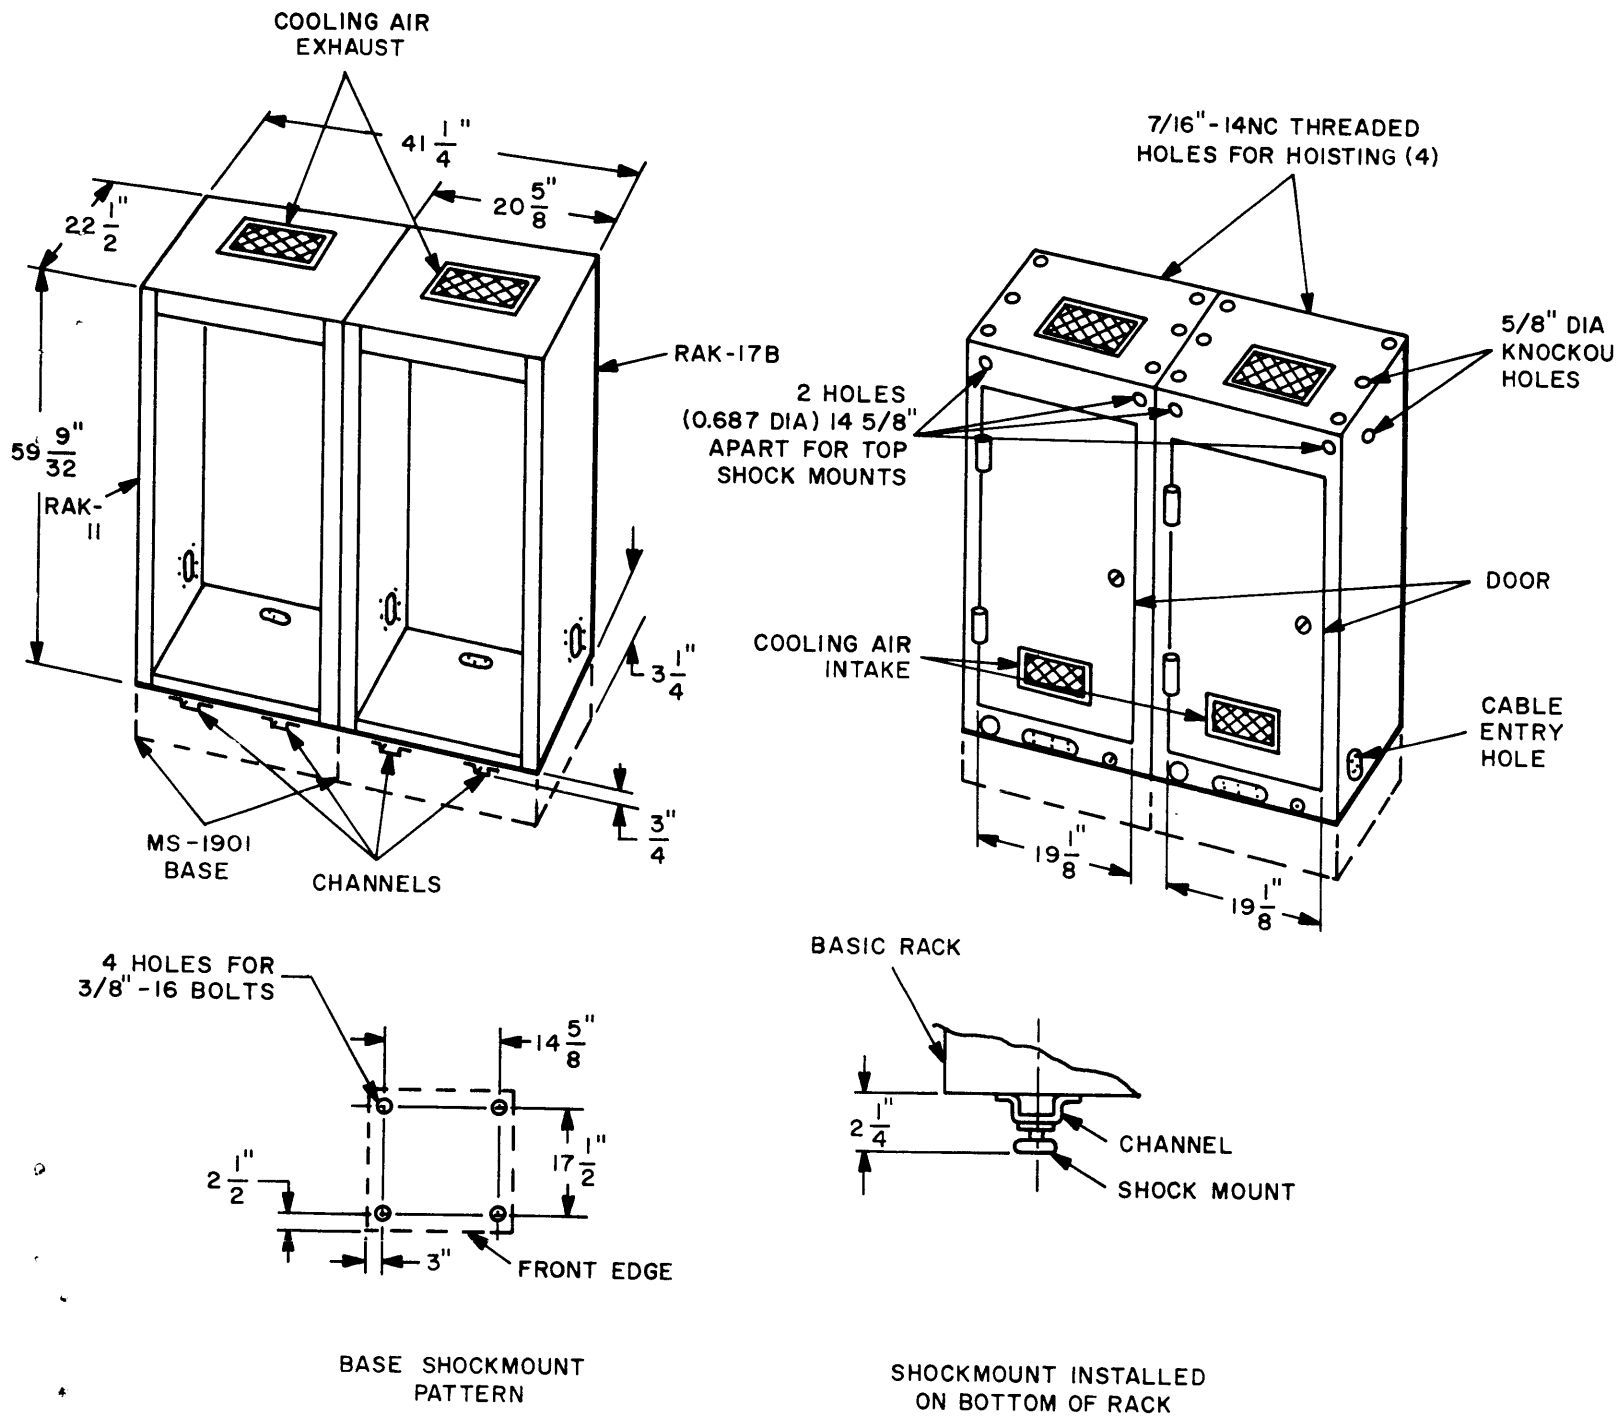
Dimensional Outline And Installation Drawing, SBT-1K(F)
